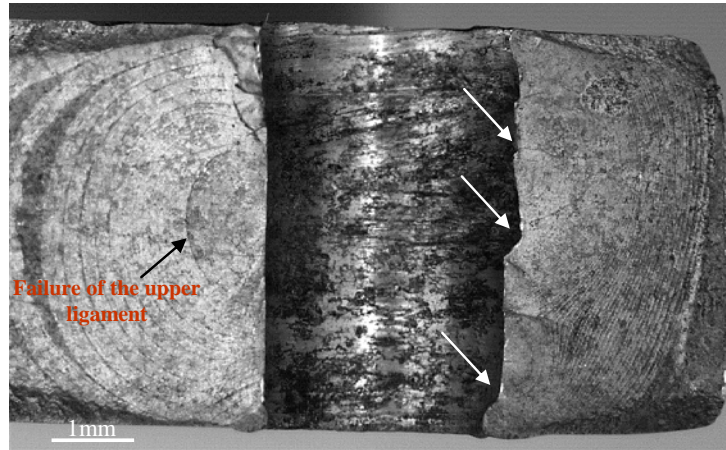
Example of a poorly drilled hole in a main wing spar made from an AA7075-T6 aluminium alloy extrusion. The cracking on the right side of the hole has initiated from gross drill damage, while the crack on the left side of the hole initiated from a drill-induced surface tear during machining.
